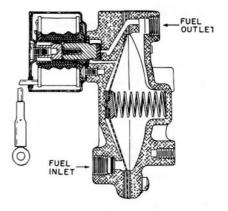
SECTIONAL VIEW OF FUEL SAFETY VALVE
